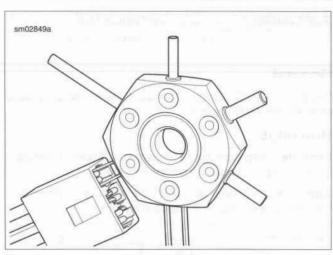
Removing Autofuse Unsealed Terminal from Ignition Switch
